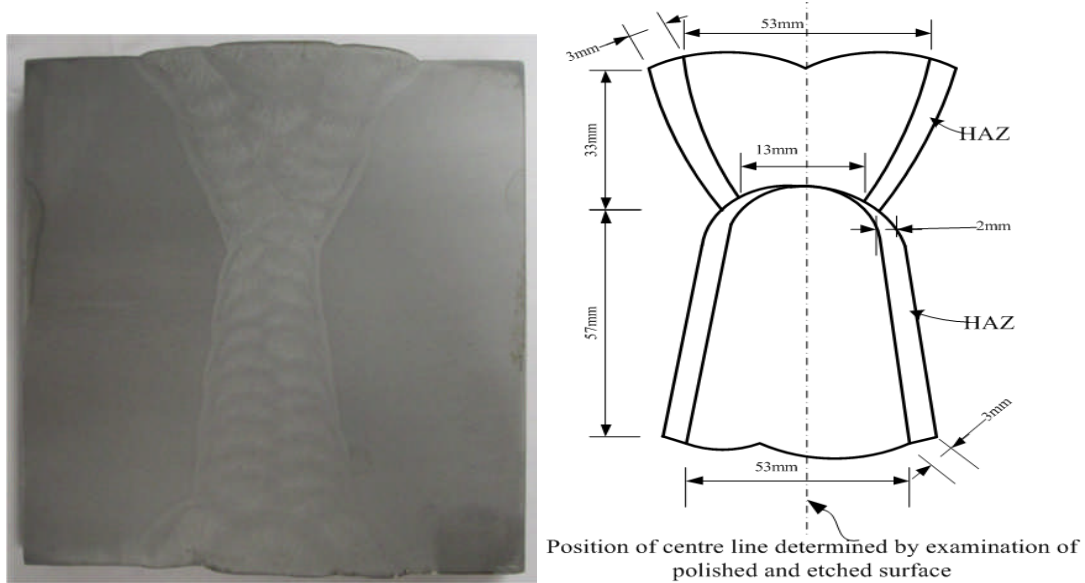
(a) Weld runs and HAZ (b) Weld and HAZ dimensions
